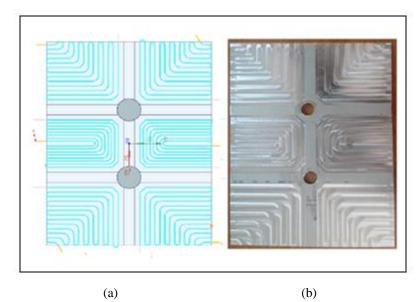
(a) Tool path; and (b) Machined specimen used to measure surface roughness
